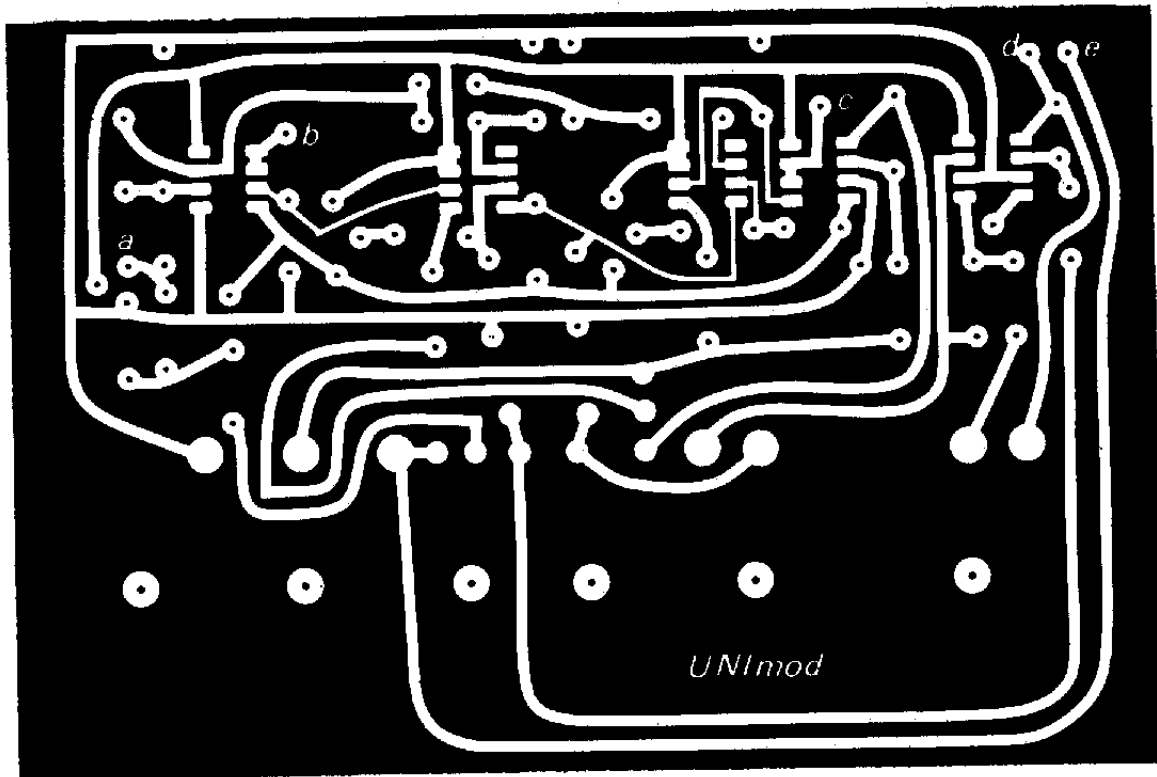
Full-size etching and drilling guide for the printed circuit board for the UniMod.
